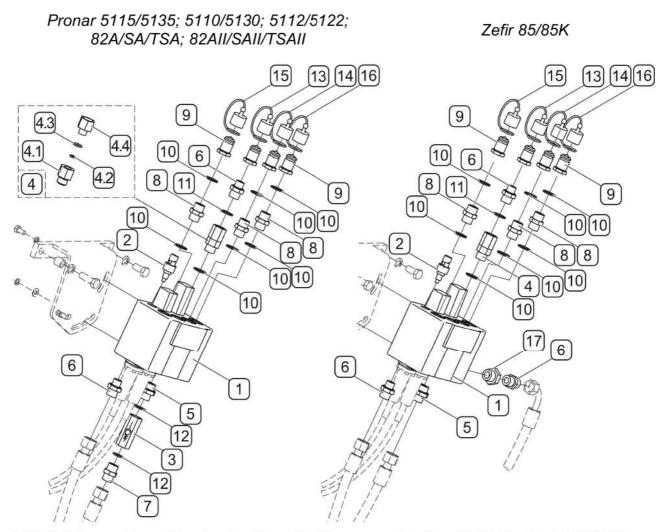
A Mounting hydraulic selective control valve (5110/5130; 5115/5135; 5112/5122; 82A/SA/TSA; 82AII/SAII/TSAII; ZEFIR 85/85K)
